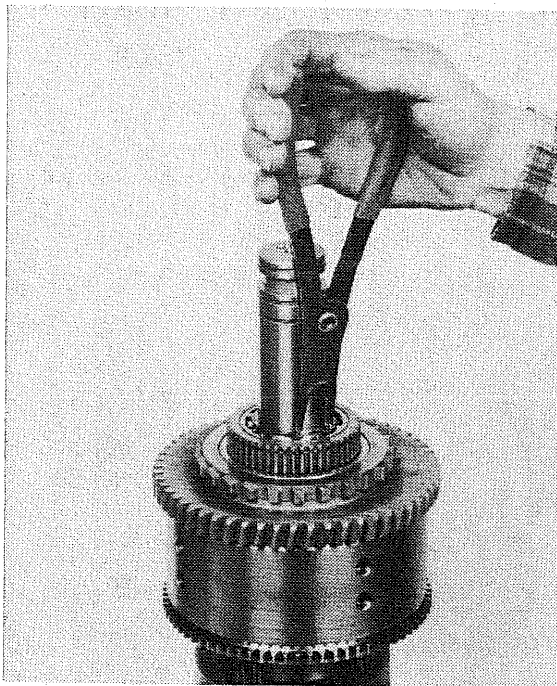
Disassembly of the PFR Clutch (3 of 4)
